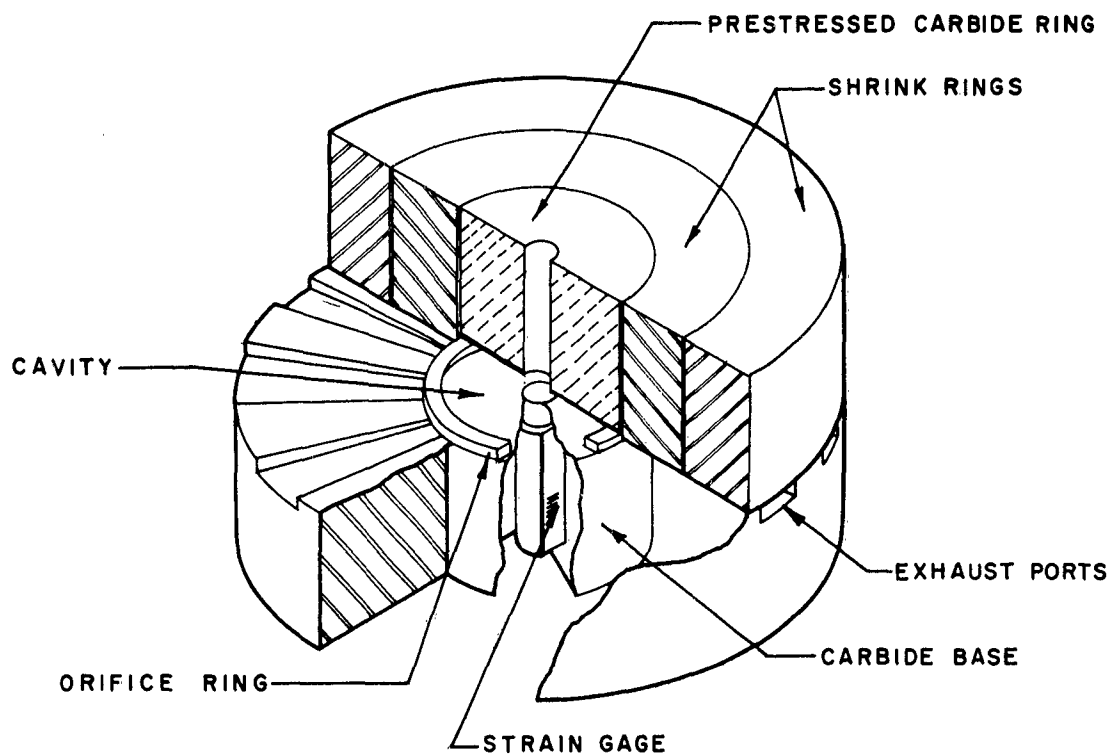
Die setup showing method of measuring cavity pressure with strain gaged carbide probe.
